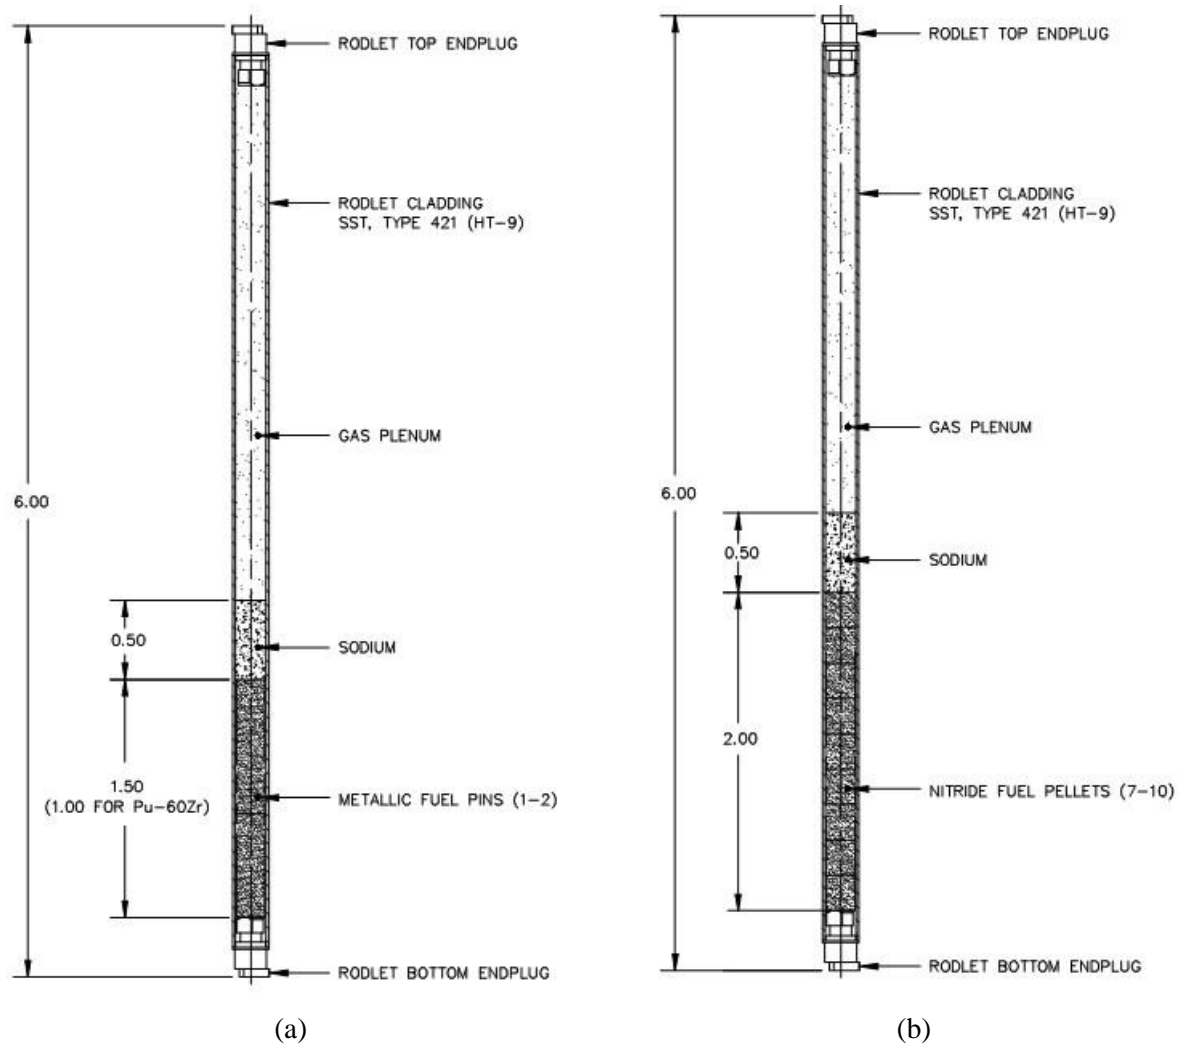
Rodlet assembly axial dimensions (inches) for a) metallic fuel and b) nitride fuel (dimensions in inches). The outer diameter of the cladding was 5.84 mm and the inner diameter was 4.95 mm.
